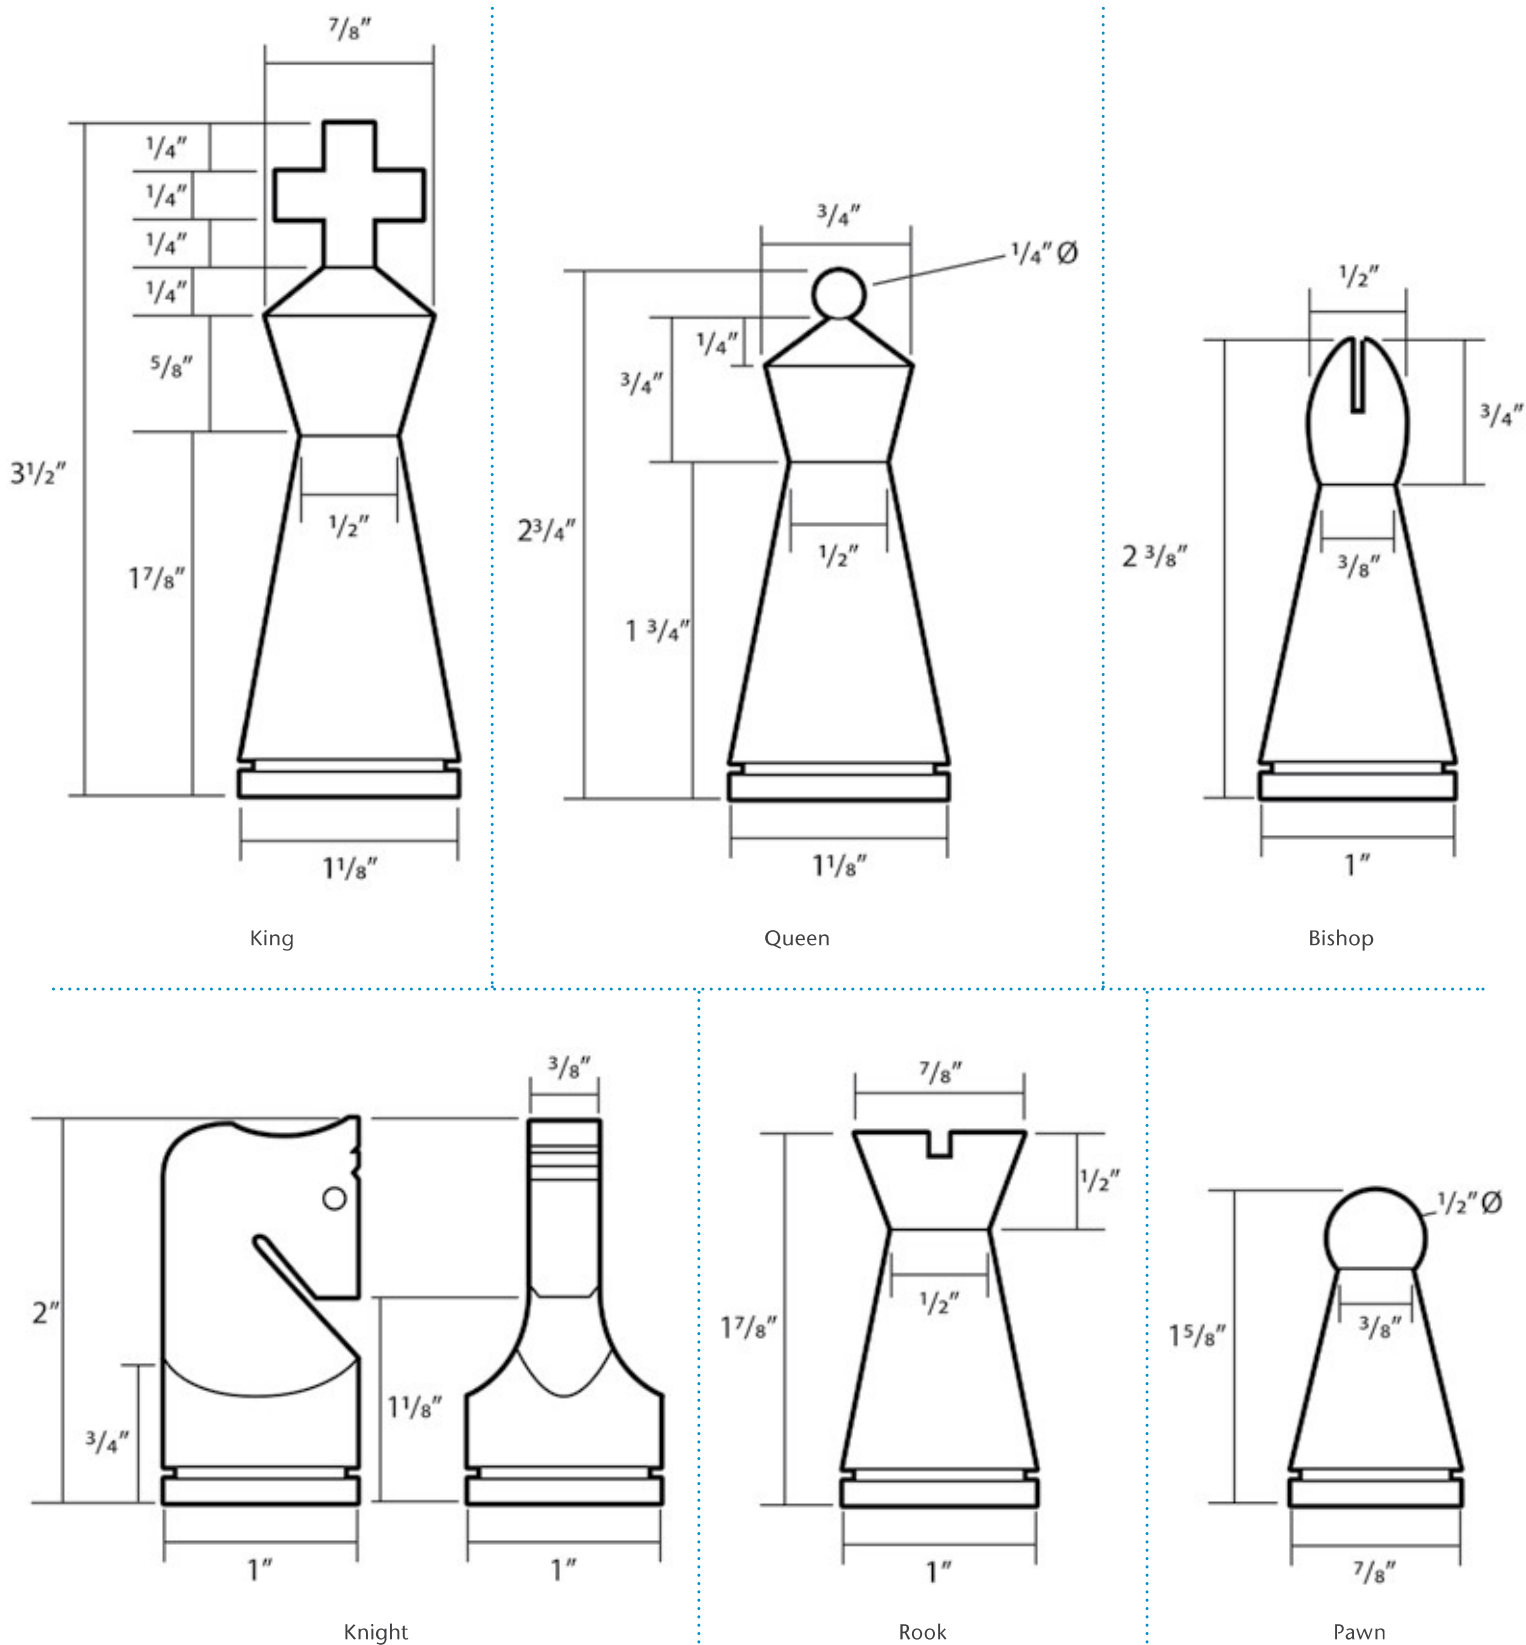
Photocopy these full-size drawings and glue to a thin sheet of cardboard. Use scissors to cut out each piece to use as a storyboard.
